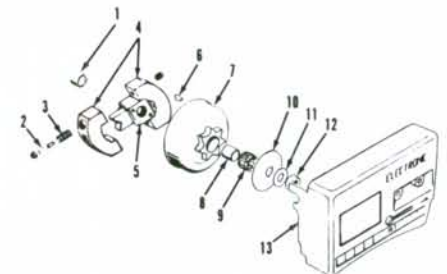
Exploded view of new design clutch used on late 070, 070S, A70 and Super Pro 70 models.
